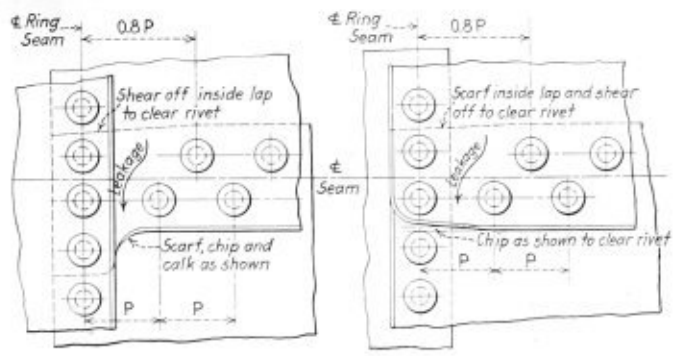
(a) and (b).—Inside and Outside Seam Construction for Double Riveted Lap Joint
